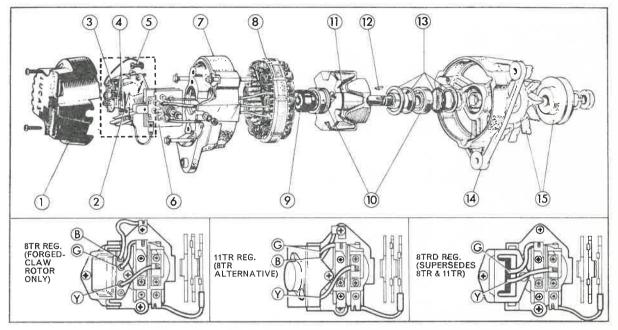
(c) Machine-sensing system, 15ACR, 16ACR and 17ACR alternators (reference Fig. 2 and 6)
